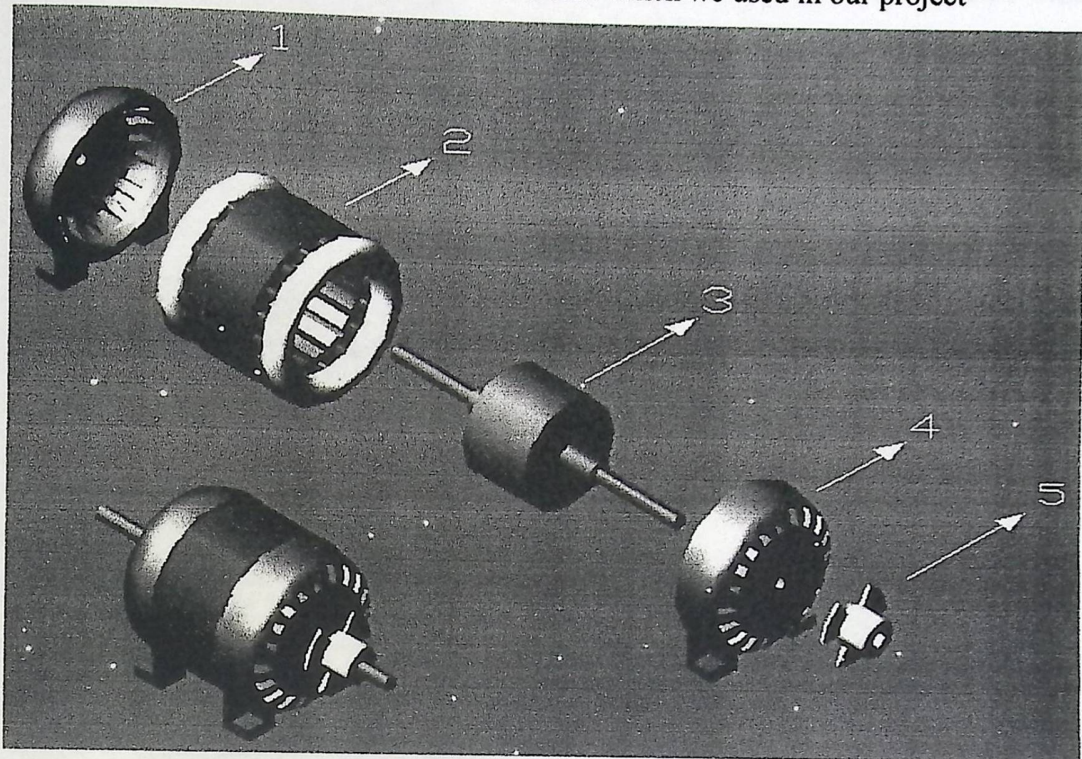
the parts of the motor, 1- Back cover 2-Stator 3- Rotor 4-Front cover
